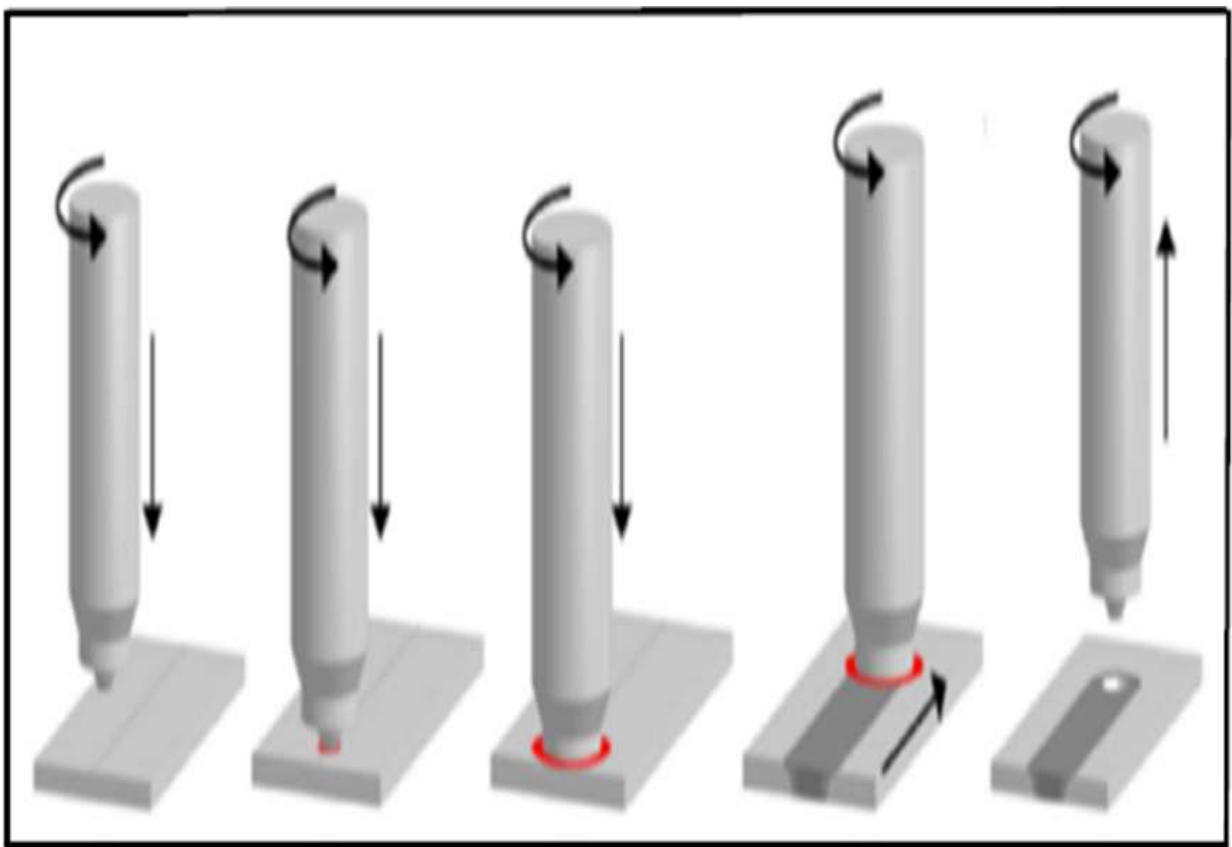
The friction stir welding process steps [Farias et al., 2013]
